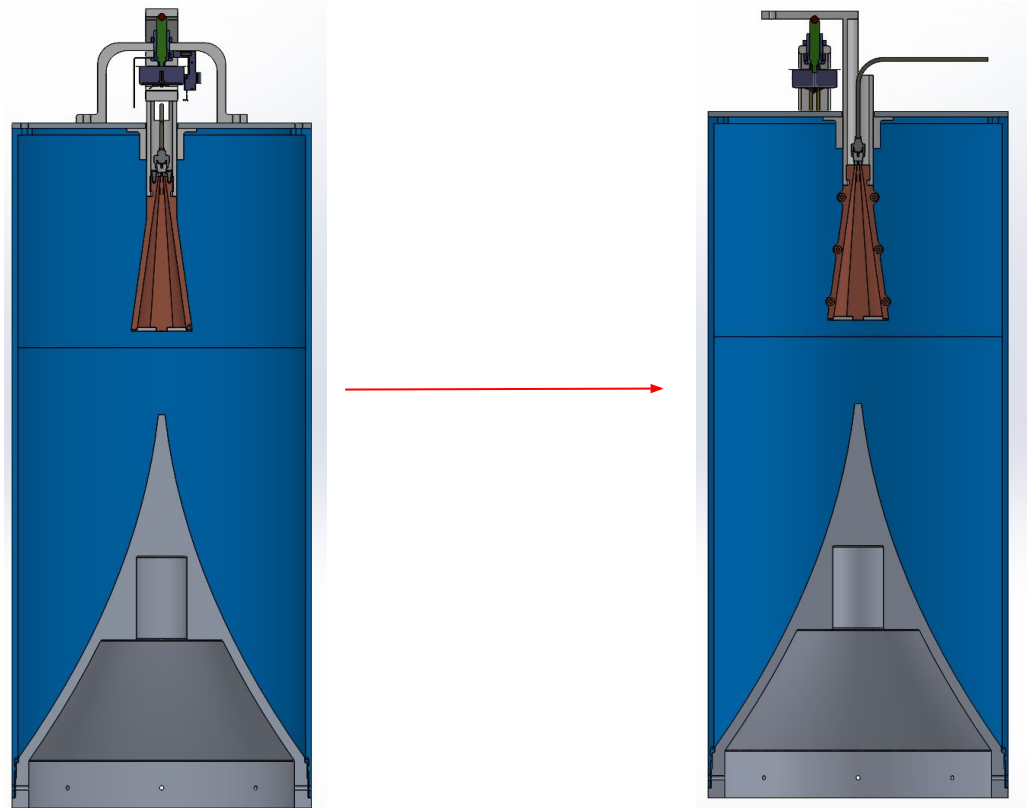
Cross section of GigaBREAD assembly design iterations. Motor moved off axis due to SMA feedthrough interference
